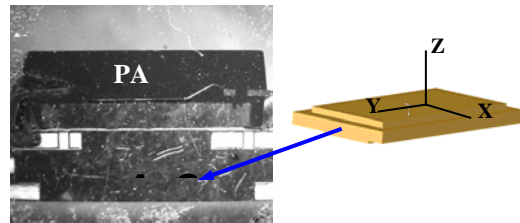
(b) Photo of a cross section of the RFPA assembly showing PA on top and heat sink on bottom of a coin (left); and a three-dimensional drawing showing the coin geometry (right).
